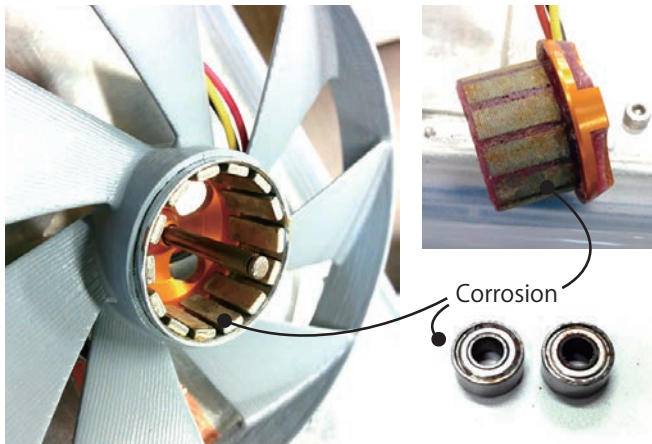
Ferrous mechanical parts corroded by the sulfurous water of the Okama. The surface of the motor stator and the magnets and ball bearings are corroded.
